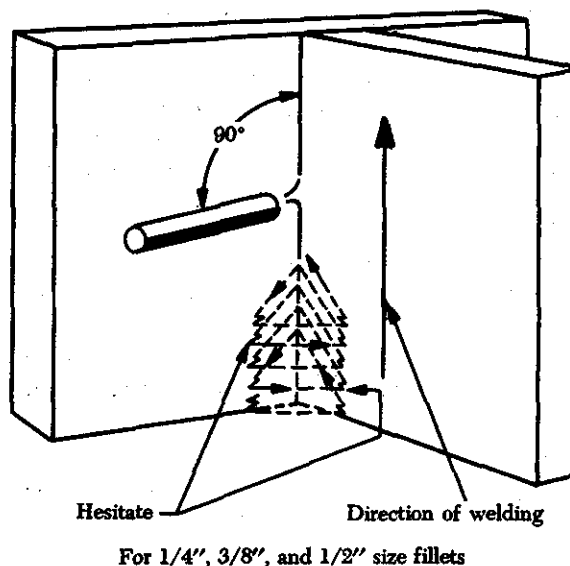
Vertical tee joint fillet weld.
